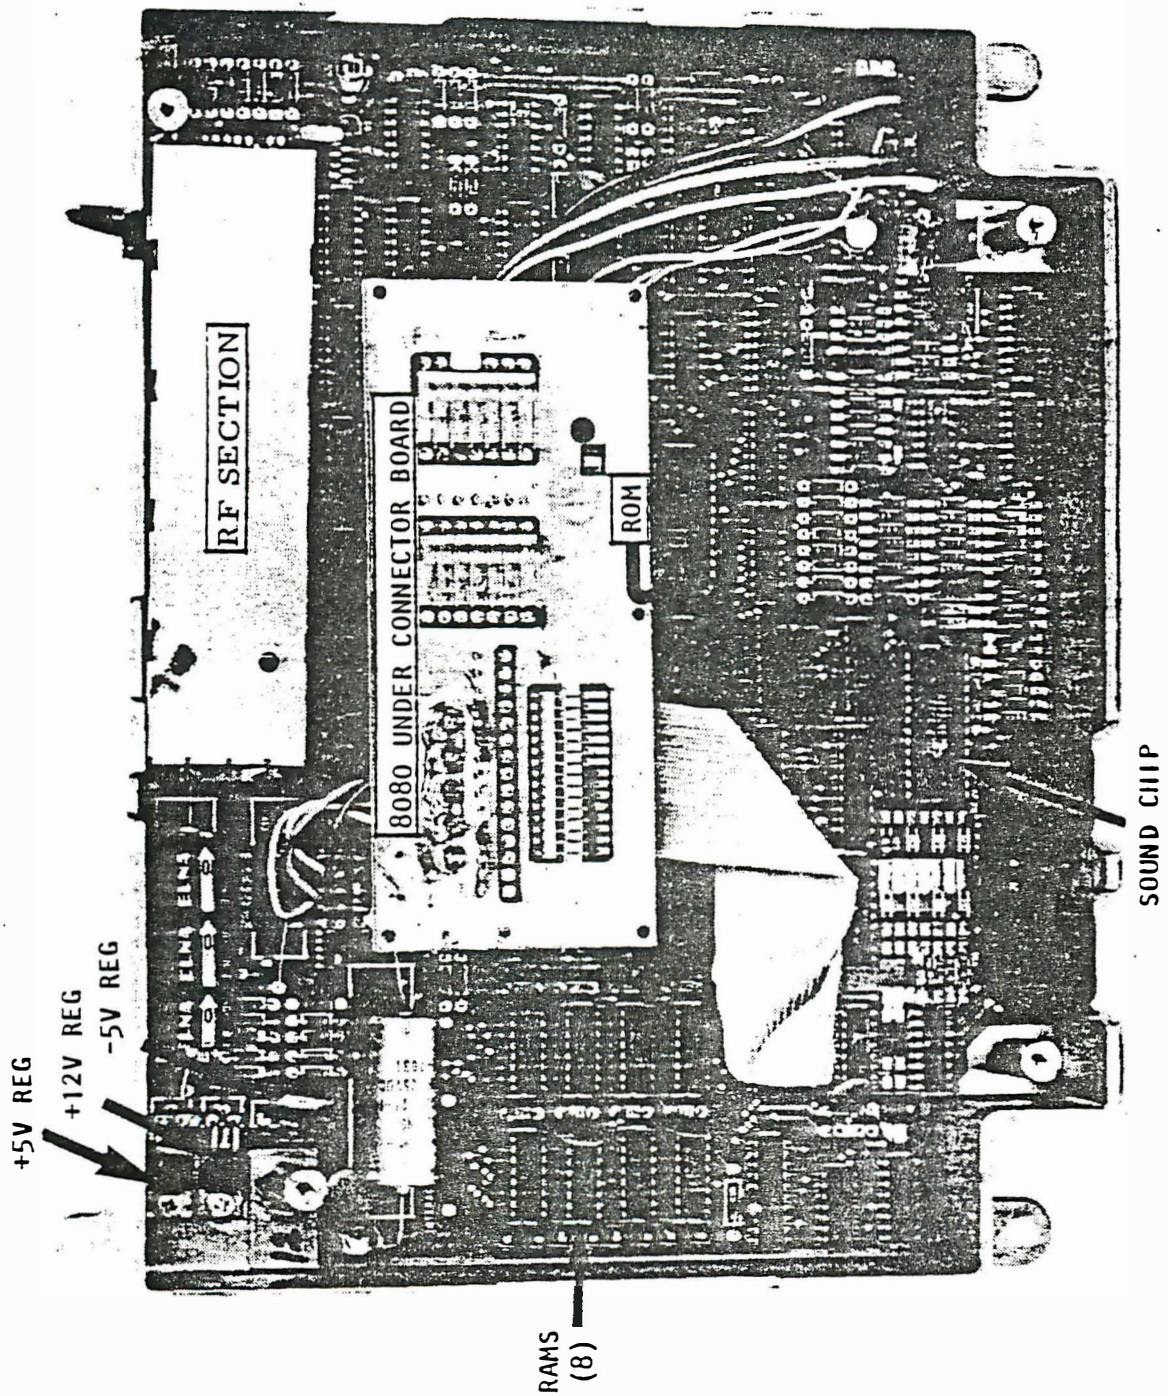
Main Electronics Sub-assembly - Top Plate Removed
